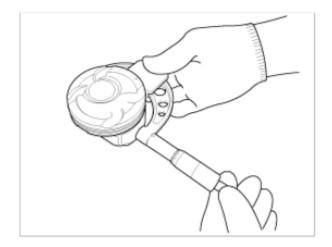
Measuring Piston Outside Diameter Using Tool Courtesy of HYUNDAI MOTOR AMERICA
